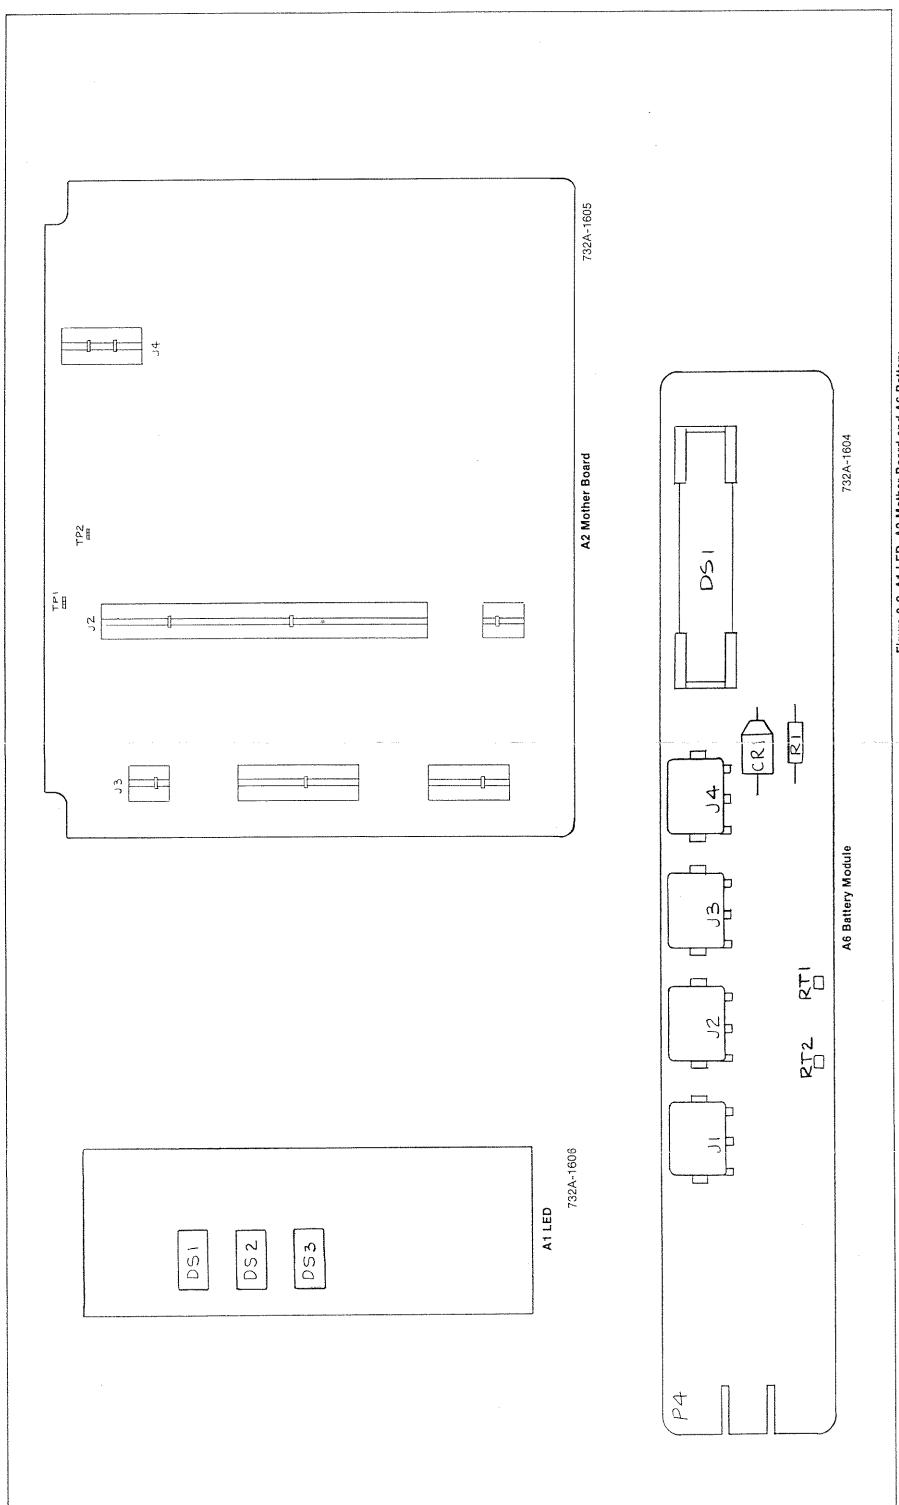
A1 LED, A2 Mother Board and A6 Battery Module PCB Assemblies
